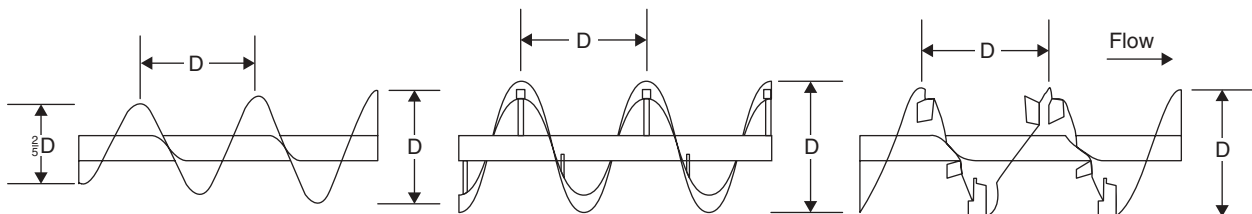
Some exotic screw designs: (a) variable; (b) ribbon; (c) cut and folded. (From the KWS, *Design, Engineering, Manufacturing Screw Conveyor Engineering Guide*.)
